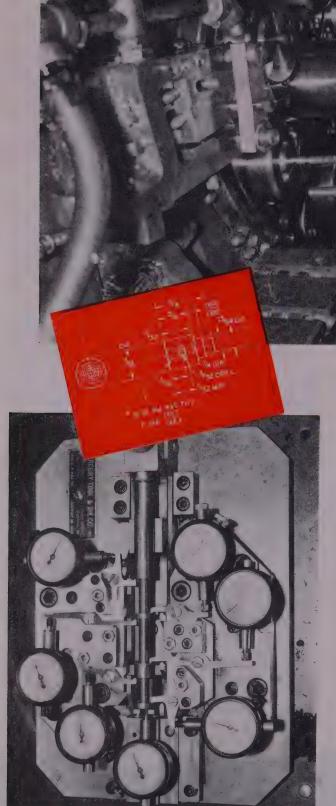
(top)—Closeup showing part of tooling in a six-spindle Acme-Gridley, especially tooling at station in which the helical oil groove is chased on outside diameter of drive shaft
